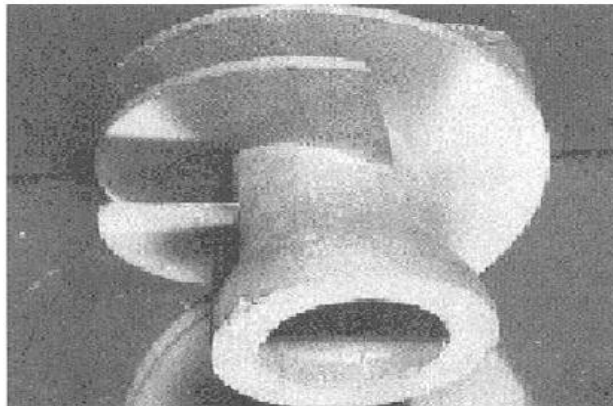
The ceramic shell is removed to reveal the final metalcasting.
